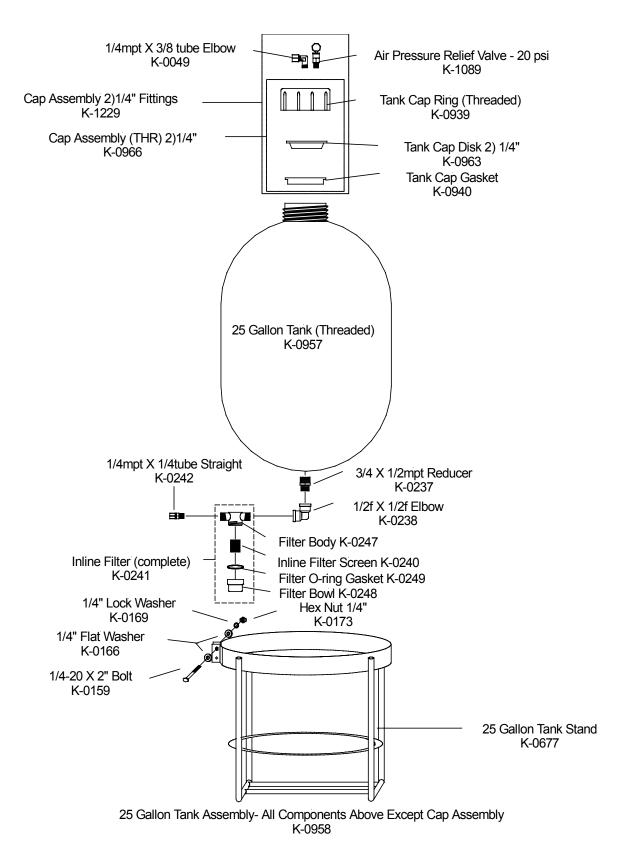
Trac Master 25 Gallon Tank Assembly
